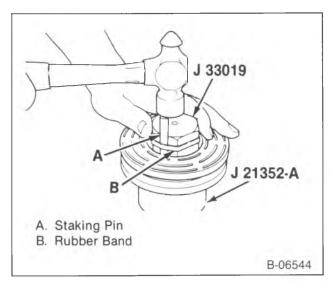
Staking the Pulley Bearing in the Rotor Bore
